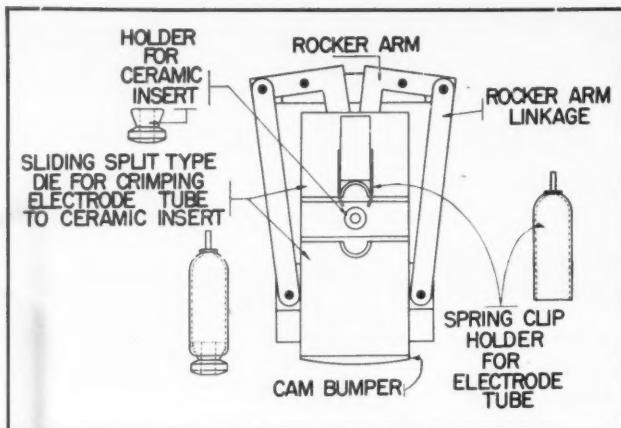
Drawing of crimping mechanism used in crimping metal electrode tubes to ceramic insulators.
